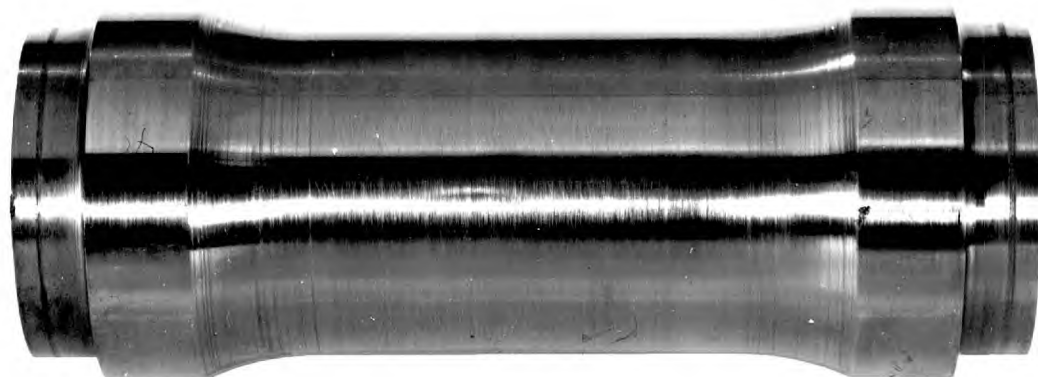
(b) External Cracks on the Opposite Side of Specimen No.16.
